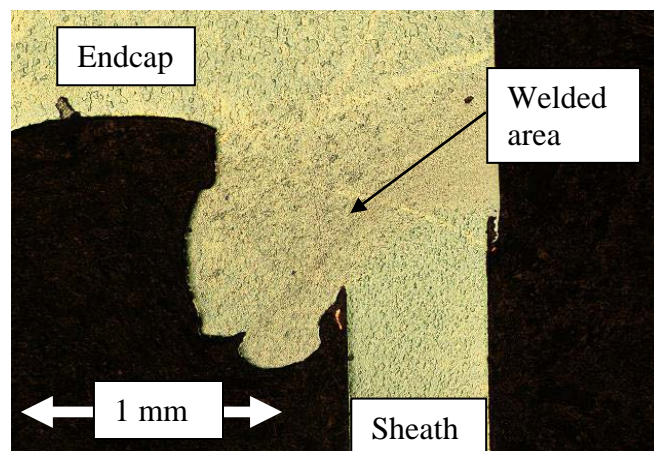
Typical Metallographic Cross-Section of the Endcap to Sheath Weld
